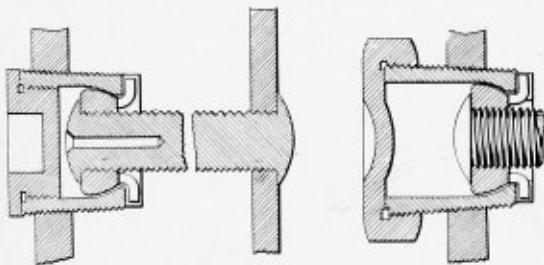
Sections Through Two Styles of Flexible Plugs
